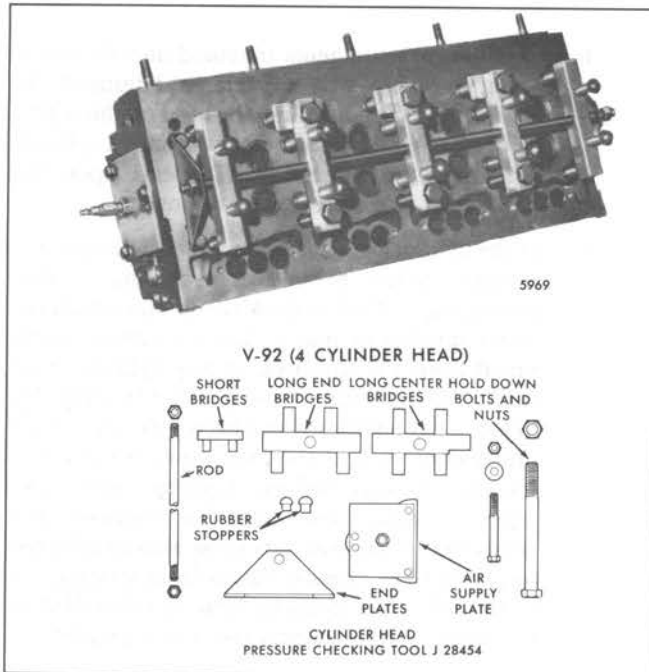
Cylinder Head Prepared for Pressure Testing using Tool J 28454
